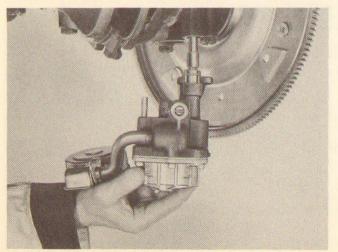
Removing Oil Pump, Vacuum Pump, and Strainer
